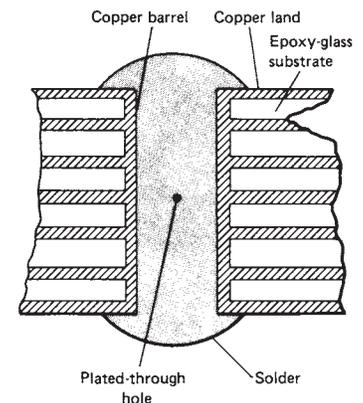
Cutaway view through a typical multilayer circuit board showing barrel-land construction and a plated-through hole
